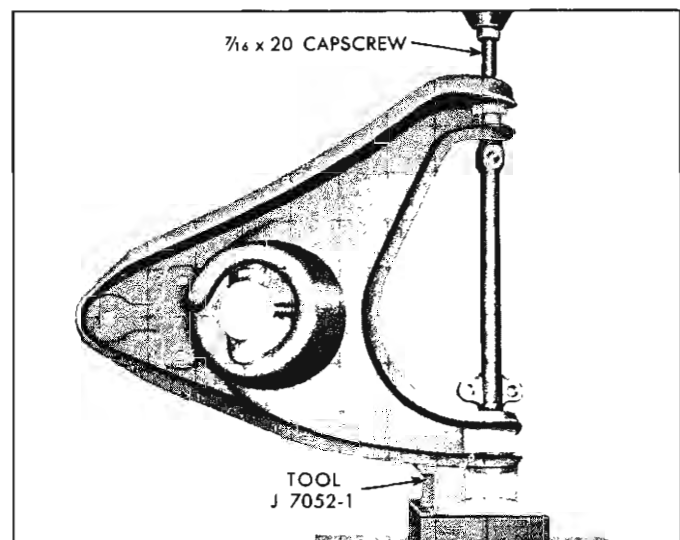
Removing Second Lower Control Arm Cross Shaft Bushing
